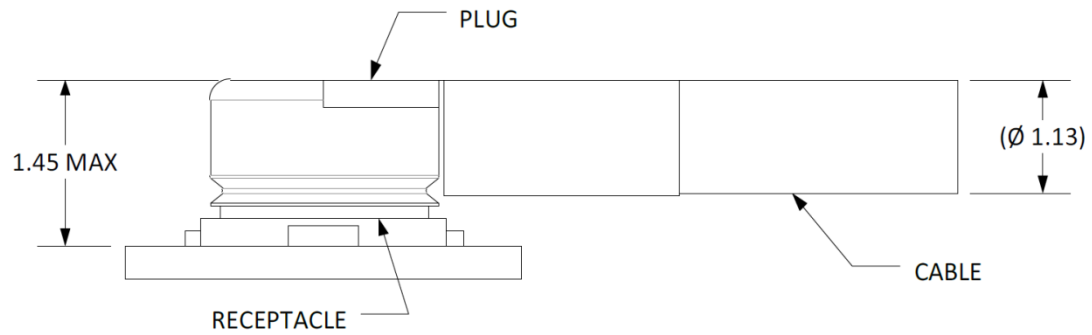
Connection between RF Connector and Mating Plug Using Ø1.13mm Coaxial Cable
